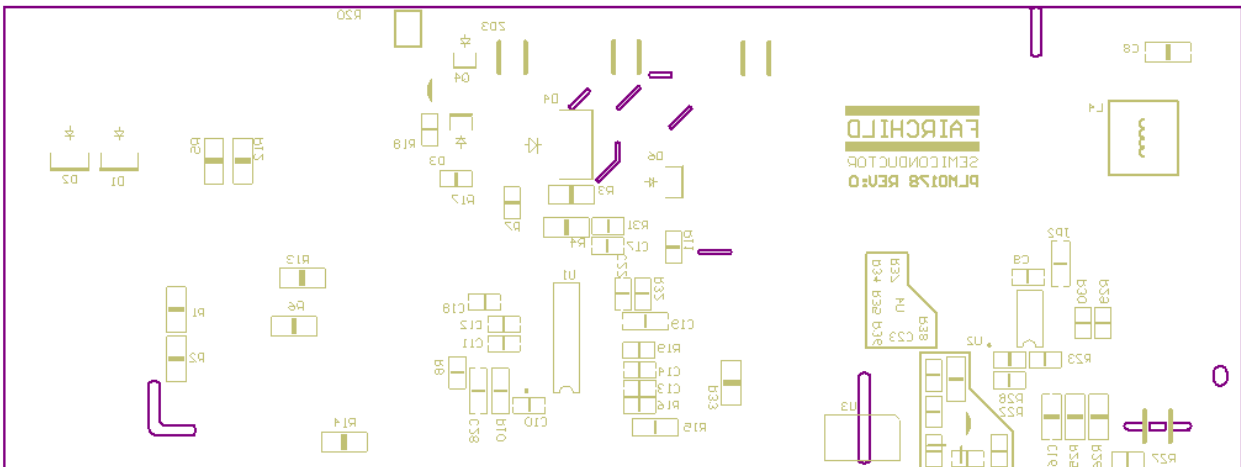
Evaluation Board Layout (Mother Board), Bottom Overlay
